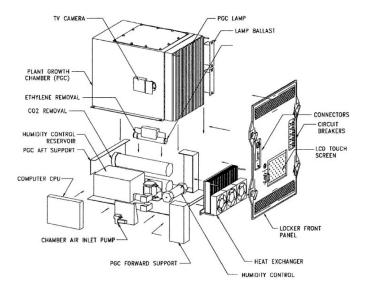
Exploded assembly drawing of the PGBA (Hoehn et al., 1997).
